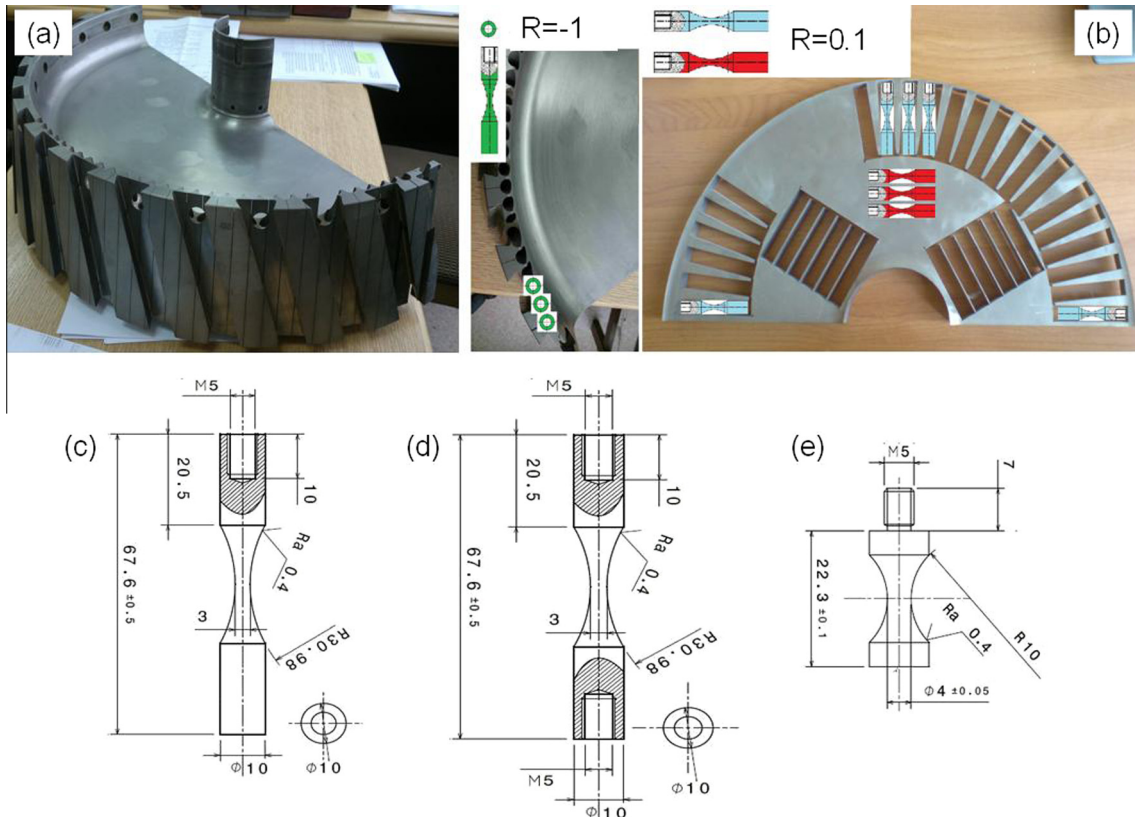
Compressor disk of D30 turbojet engine (a), location of specimens in the disk (b), (c) and (d) geometries of tensile specimens, (e) geometry of torsion specimen, (all the dimensions are in mm).
